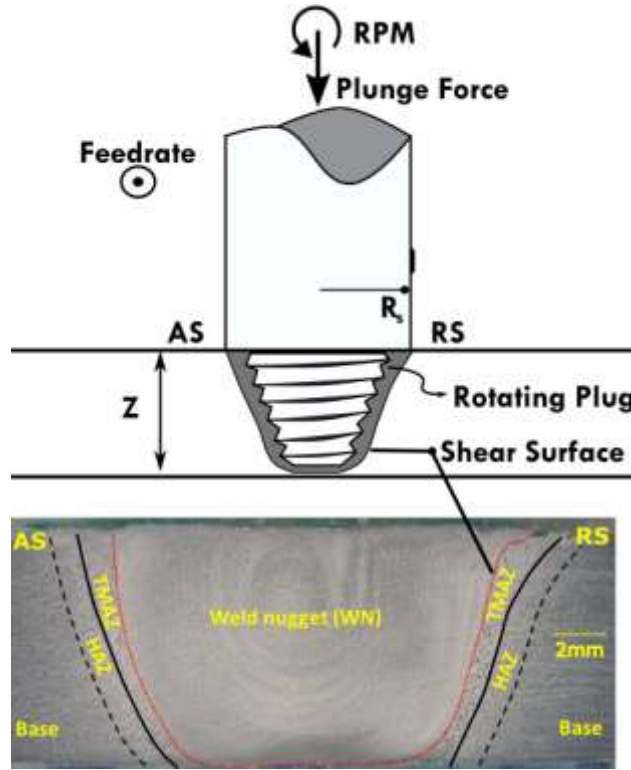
Macrostructure at transverse section of FS weld showing trace of shear surface. Above is shown schematically the shear surface and the plug of metal that rotates with the tool. Outside the trace of the shear surface the Thermo-Mechanically Affected Zone (TMAZ) can be distinguished by distorted parent metal. Further out is the Heat Affected Zone (HAZ) marked by a distinct structure (and hardness) but without obvious metal distortions.
